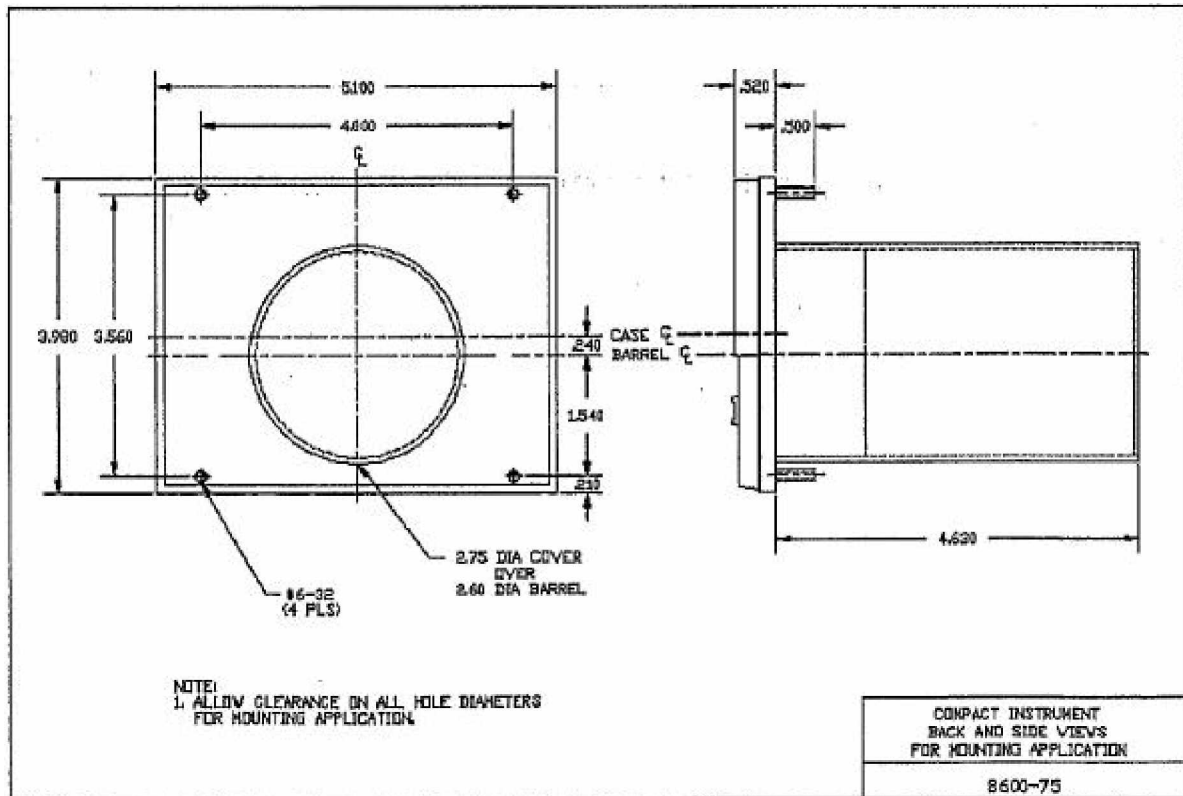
DIMENSIONS AND PANEL CUTOUT
